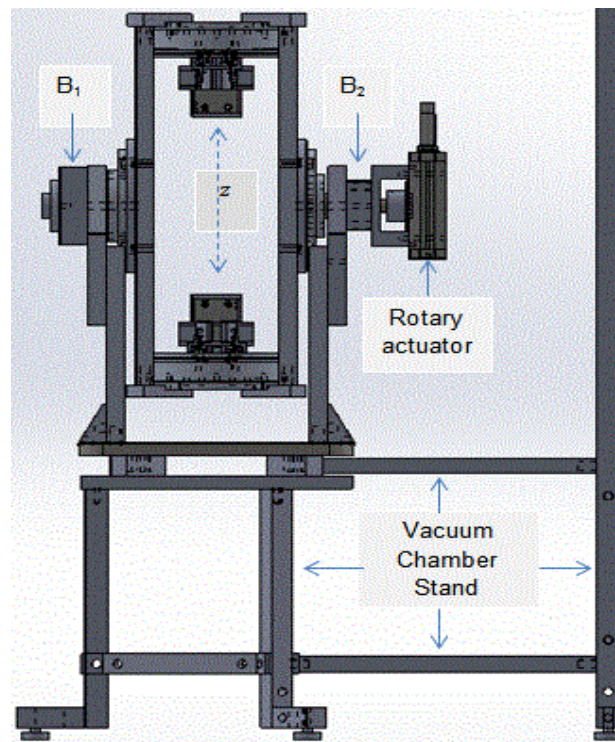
The vacuum chamber with the stand indicating all mechanical components
